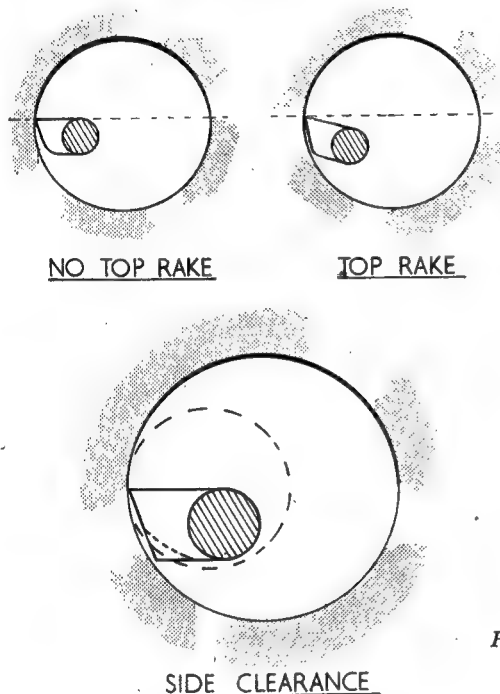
Illustrating the rake, clearance, and relief angles of a boring tool
